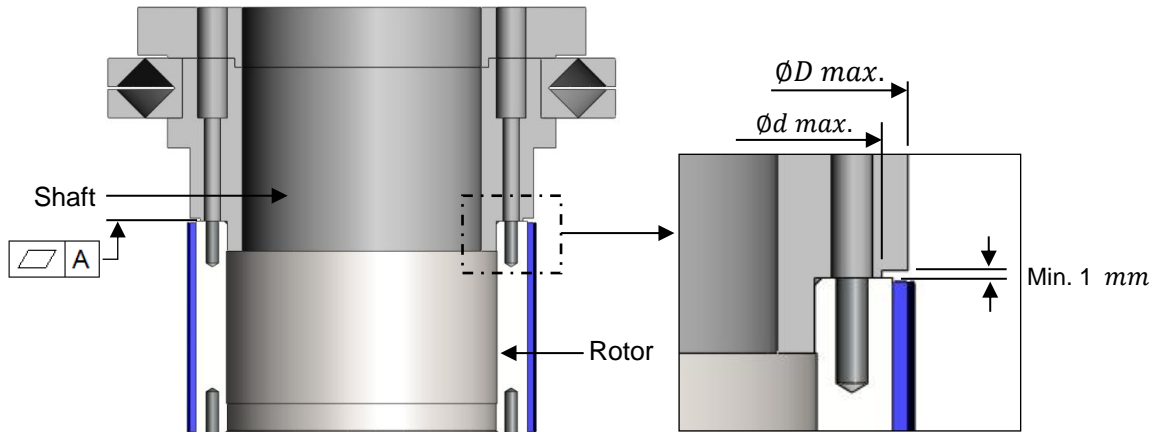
Rotor mounting interface (TMRW/TM-2)
